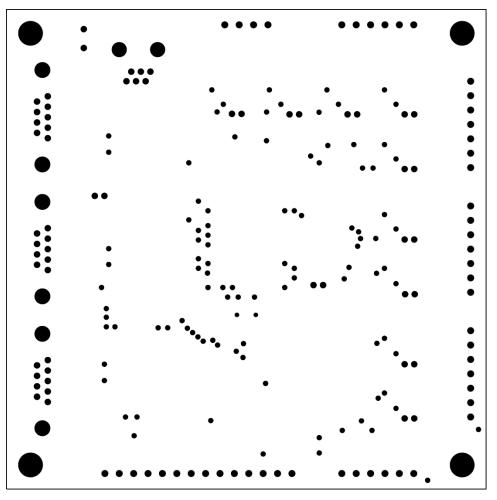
PCB Bottom Solder Mask (Scale = 1:1)
